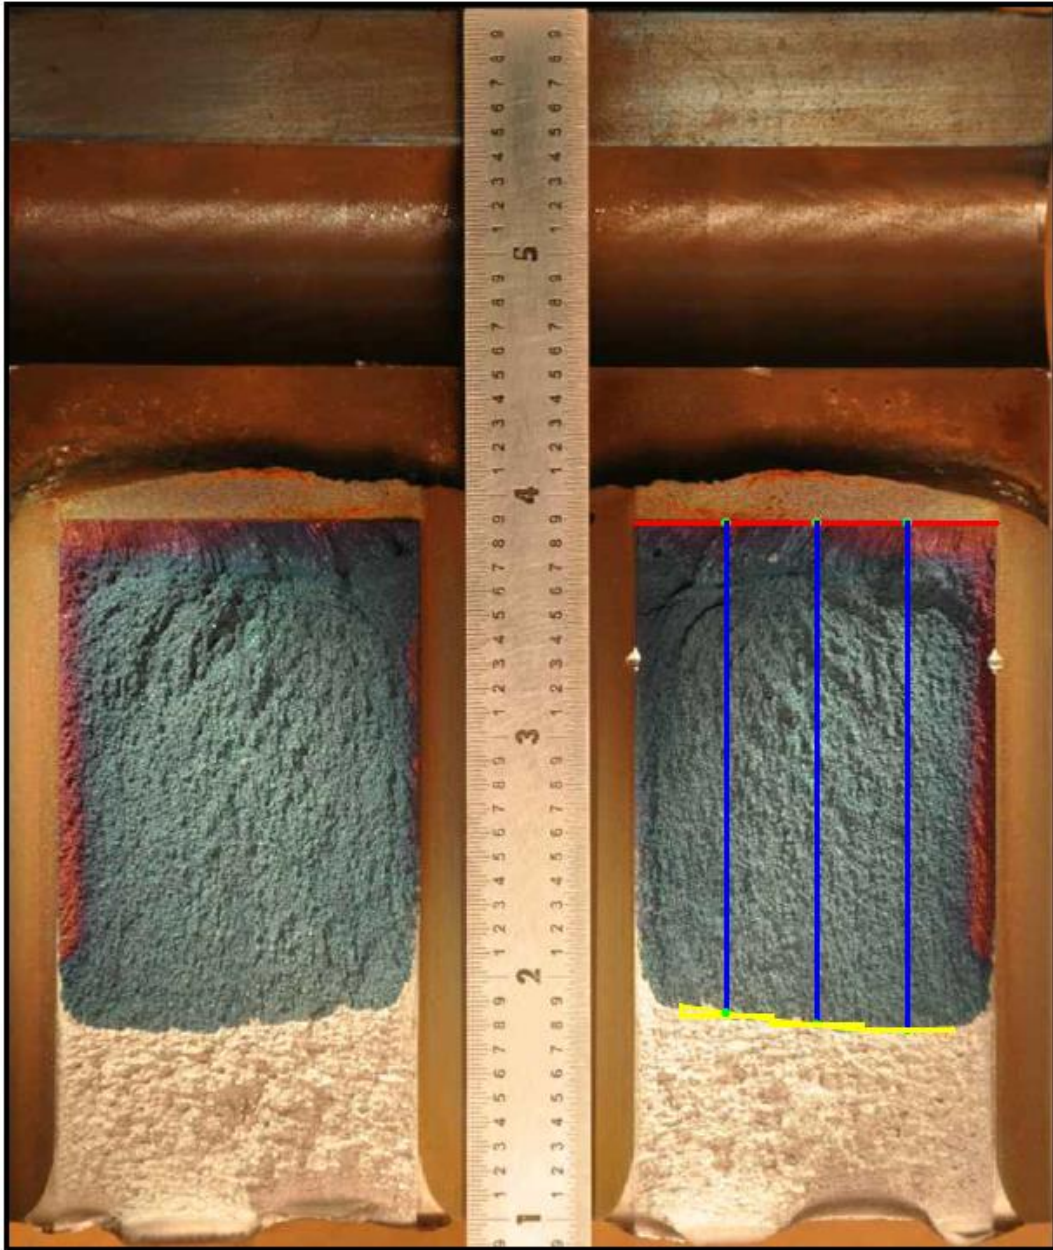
Specimen E21a Fracture Surface
